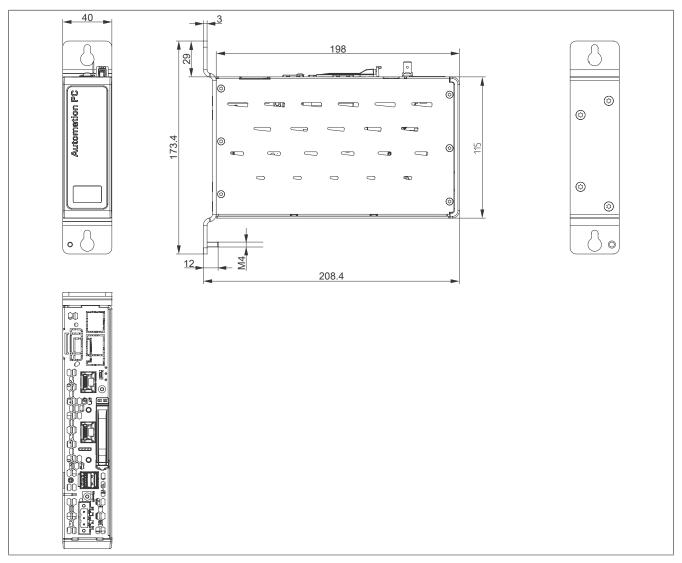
Automation PC 2100 with rear mounting plate (book style) - Dimensions
